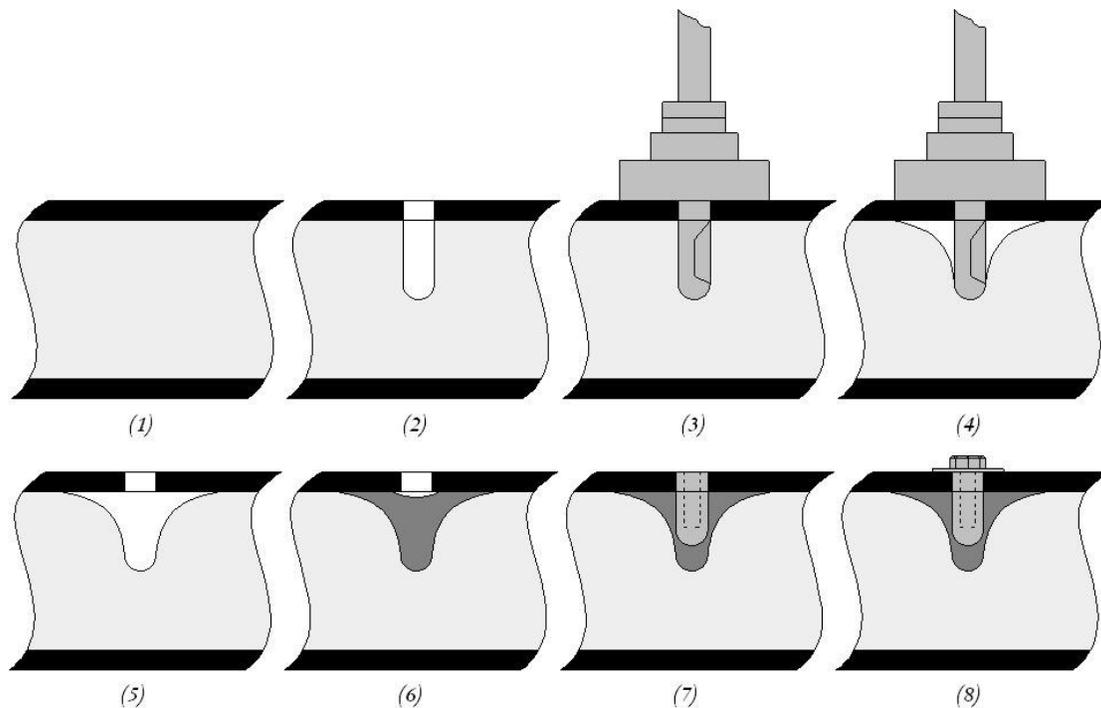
Schematic of the system: (1) Foam core sandwich structure, (2) Drill a hole through the face sheets with the same diameter as the milling tool, (3) Adjust the milling tool for the specific face sheet thickness. Place the milling tool in the drilled hole and attach it to a power drill, (4) Mill the cavity, (5) Clean the cavity with a vacuum cleaner, (6) Use the specific adhesive dispenser to fill the cavity with adhesive, (7) Place the insert in the cavity, (8) Time for curing.
